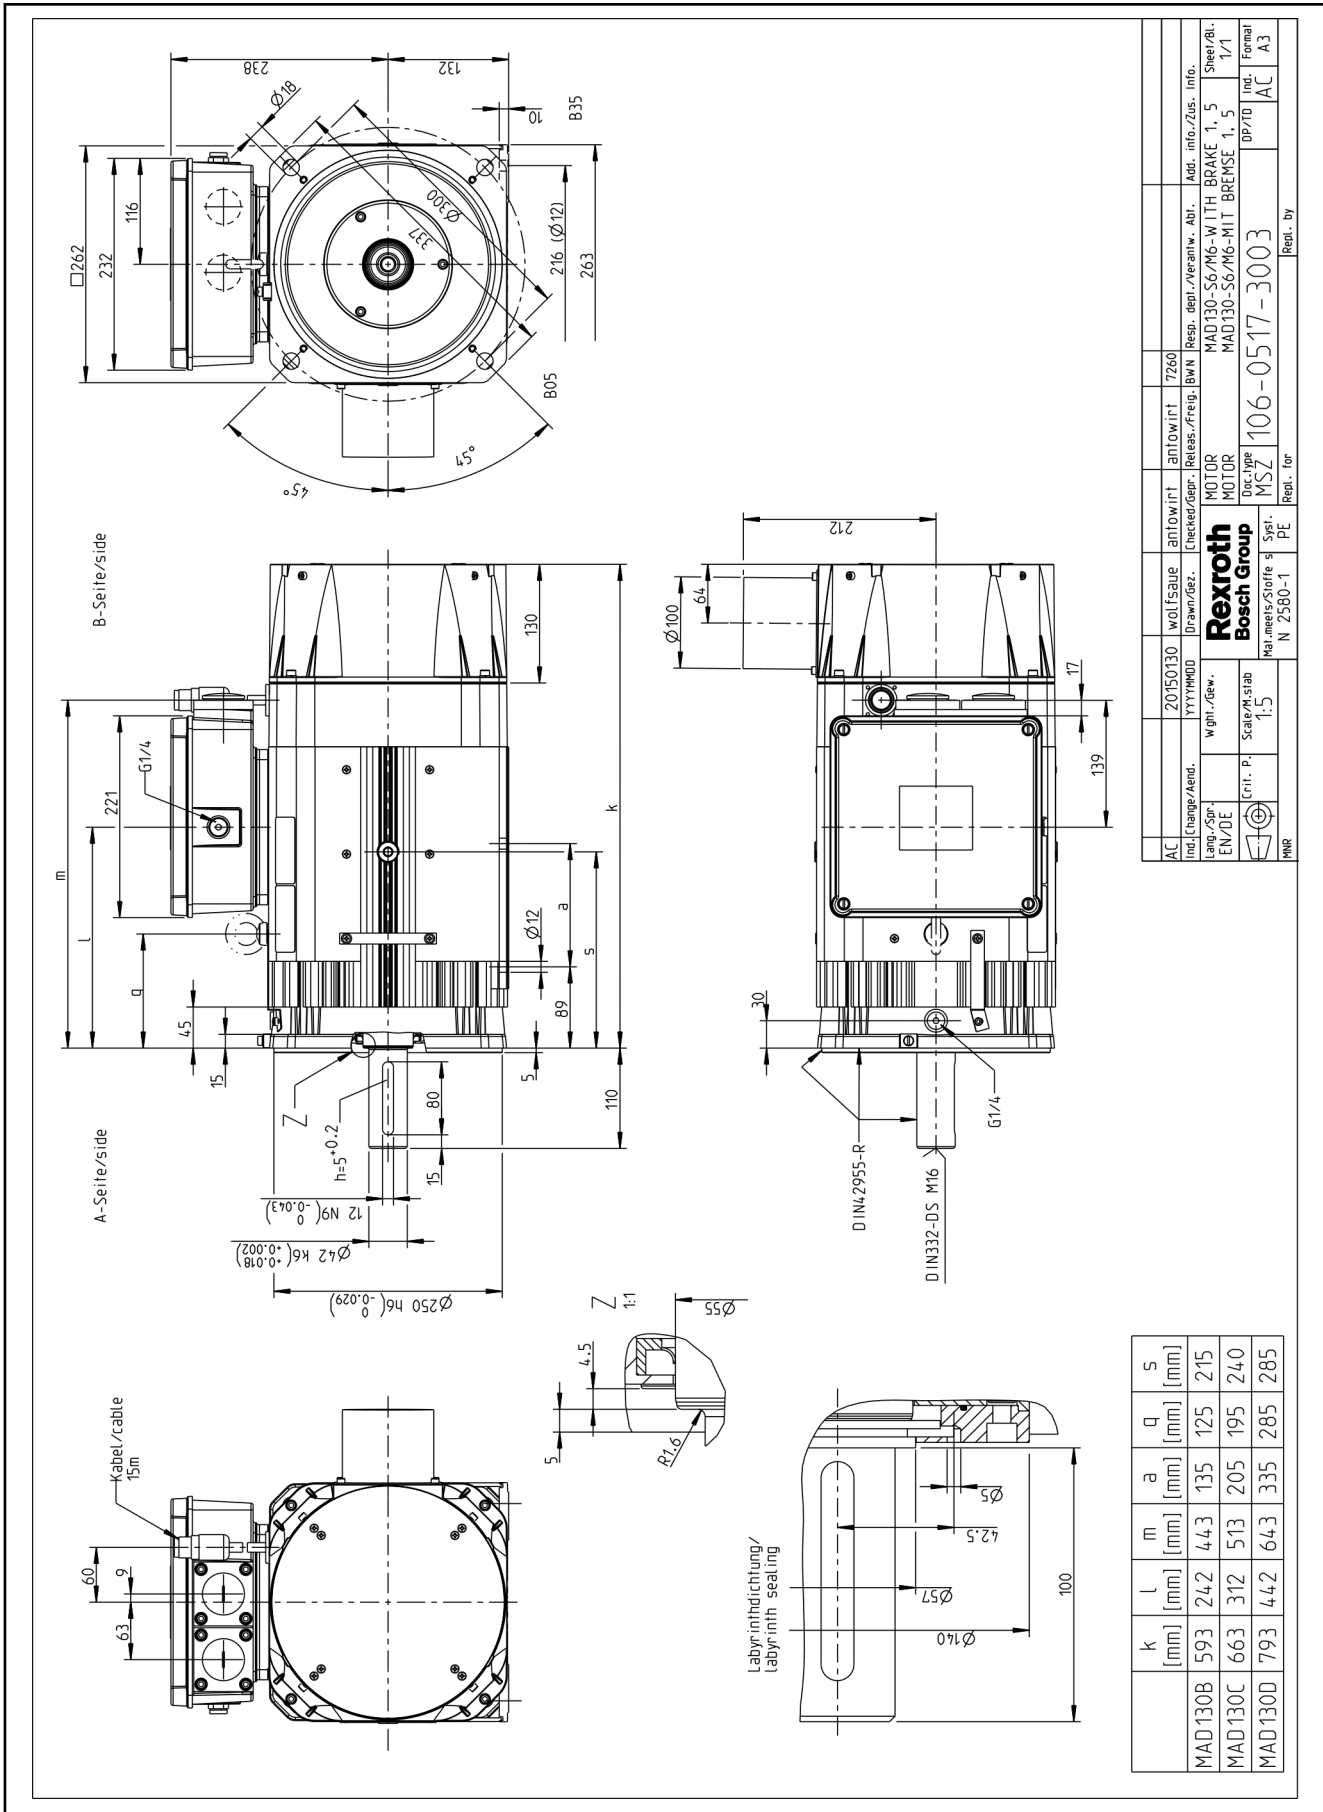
MAD130 with M6/S6 encoder, brake 1/5
